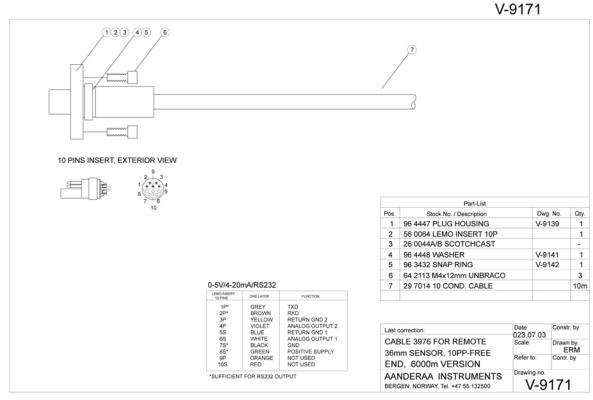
Drawing Cable 3976 (1000-6000 m).
